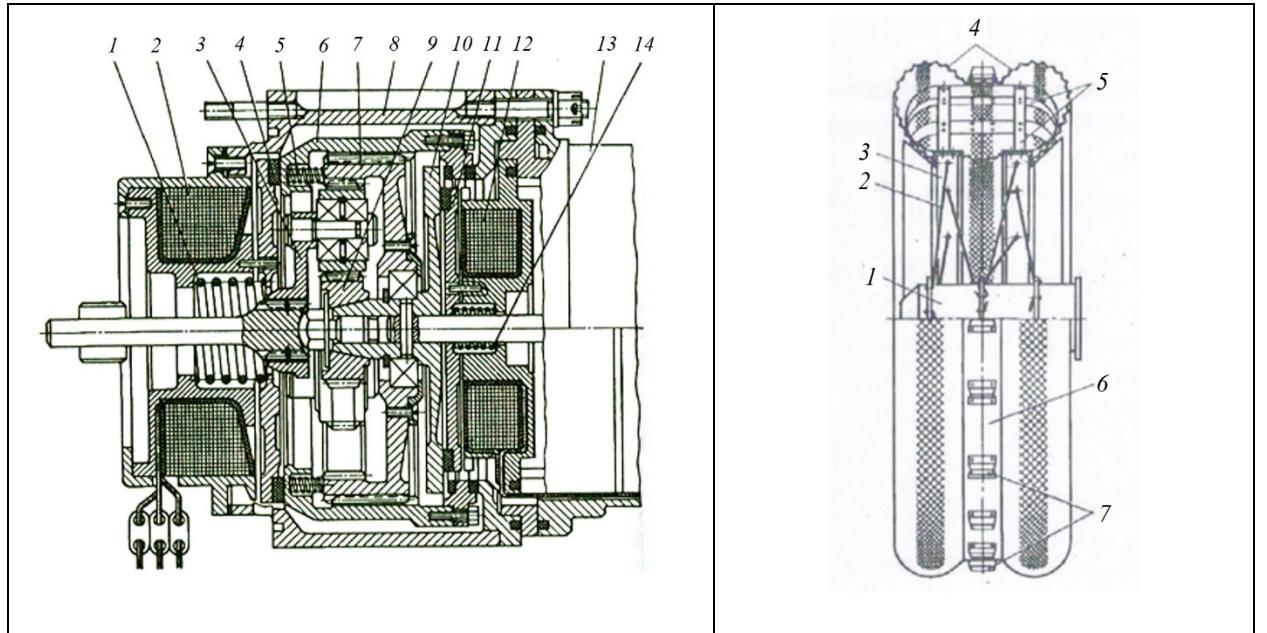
Two-stage automatic gearbox. 1 - gearbox spring, 2 - 1st gear electromagnet, 3 - driver, 4 - 1st gear brake disk, 5 - 2nd gear spring, 6 - drum, 7 - epicycle, 8 - housing, 9 - sun gear, 10 - disk on the motor shaft, 11 - wheel brake disk, 12 - wheel brake electromagnet, 13 - motor, 14 - wheel brake spring.
